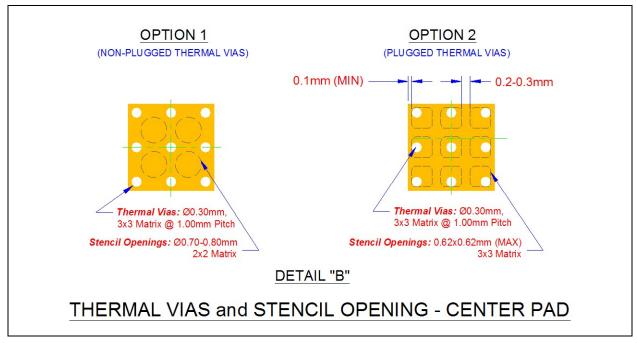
CAP1188 PCB Detail B - 24-Pin QFN 4mm x 4mm
